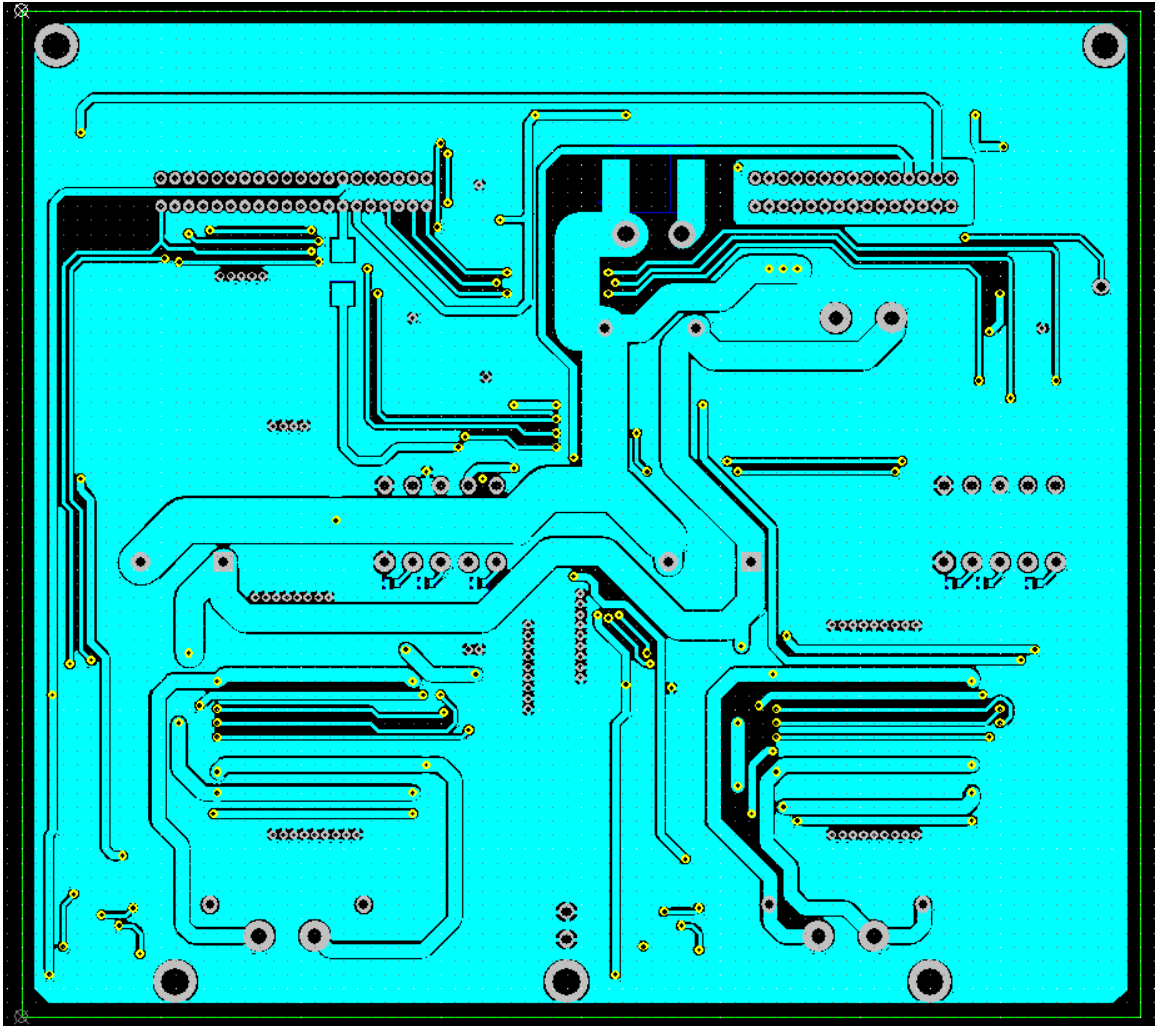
DC Daughtercard, bottom copper & bottom silk
